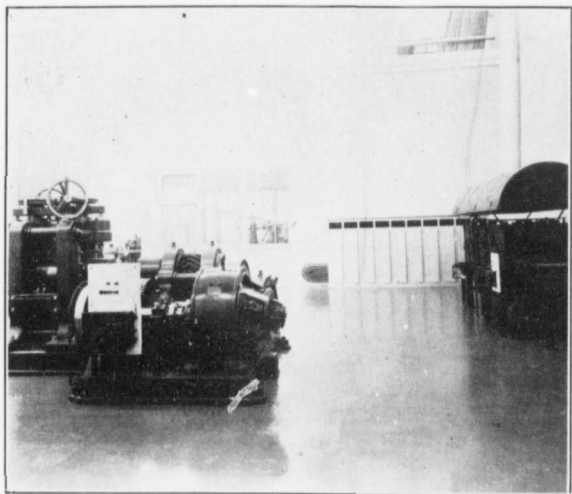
Breaking-down mill and fillet-annealing furnace.
